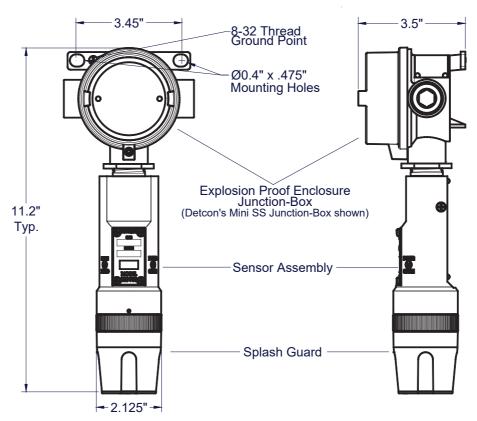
Outline and Mounting Dimensions (Mini Stainless Steel Junction Box)
